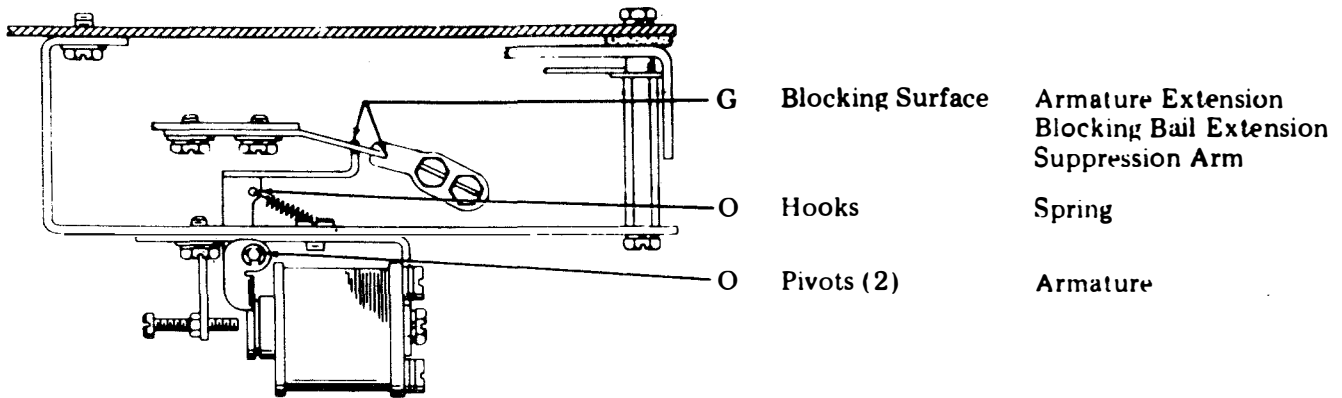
DC Magnet-Operated Print Suppression Mechanism, Left Side View
